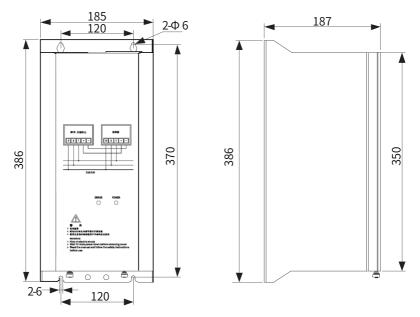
Overall dimensions of the MDBU series braking unit (MDBU-200-X) (unit: mm)
